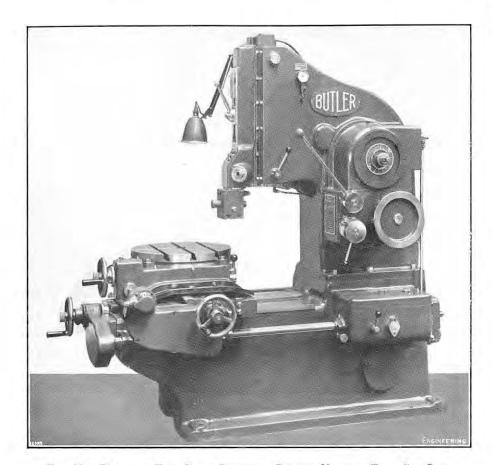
Precision Tool-Room Slotter; Butler Machine Tool Co., Ltd.
